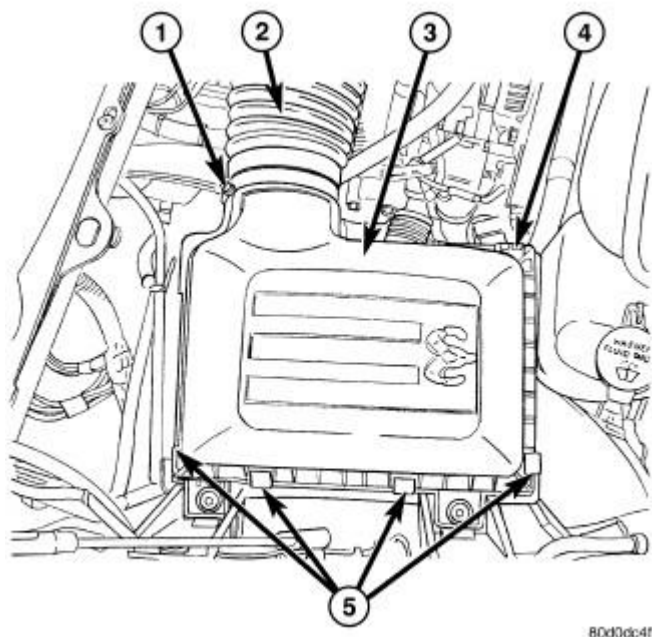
Air Cleaner Housing Cover, Air Duct & Fasteners
